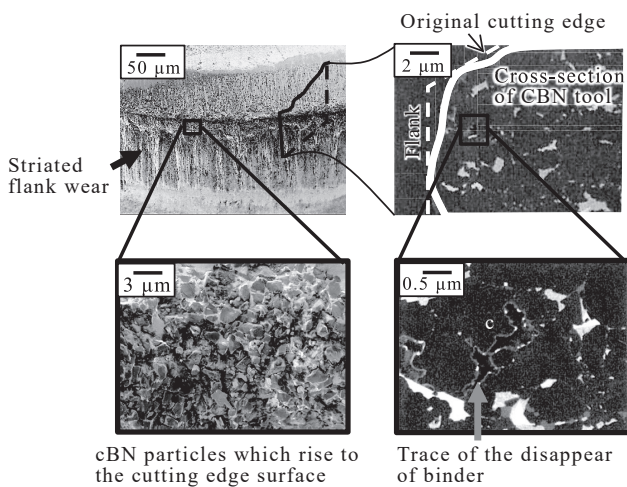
Damage pattern of cutting edge in the machining of a sintered alloy
